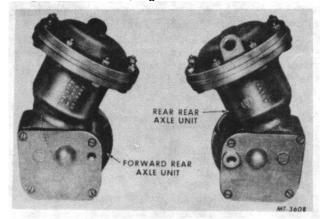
Air-Torsion Spring Shift Units for Tandem Drive 2-Speed Axles
